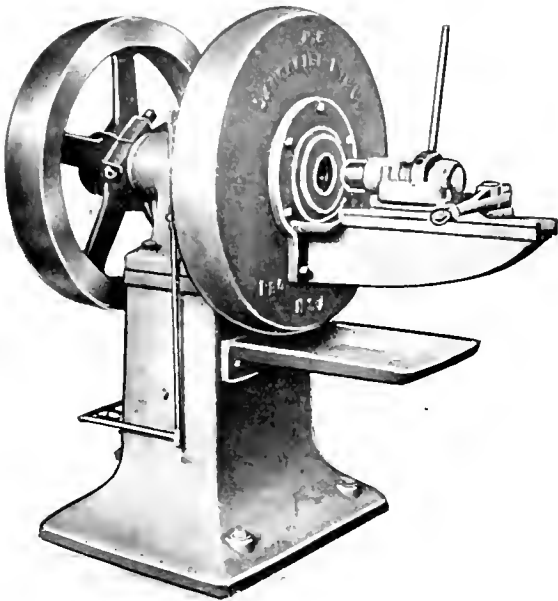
The Langeller Reducing Machine, fitted with Attachments for Finishing Automobile Engine Valve Stems.
